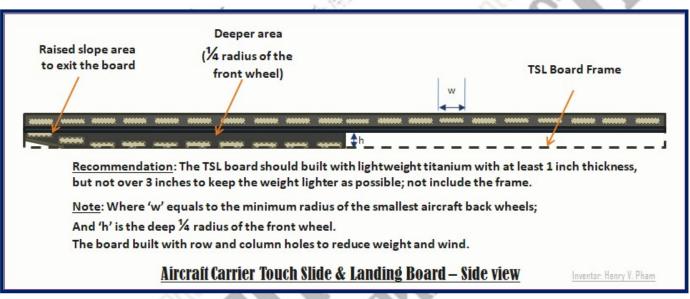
Touch-Slide & Landing Board without Wheels Locks - Side view
